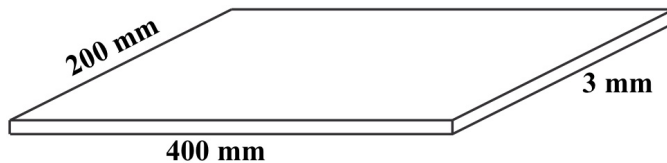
Schematic illustration of the extruded sheets used for GMAW.
